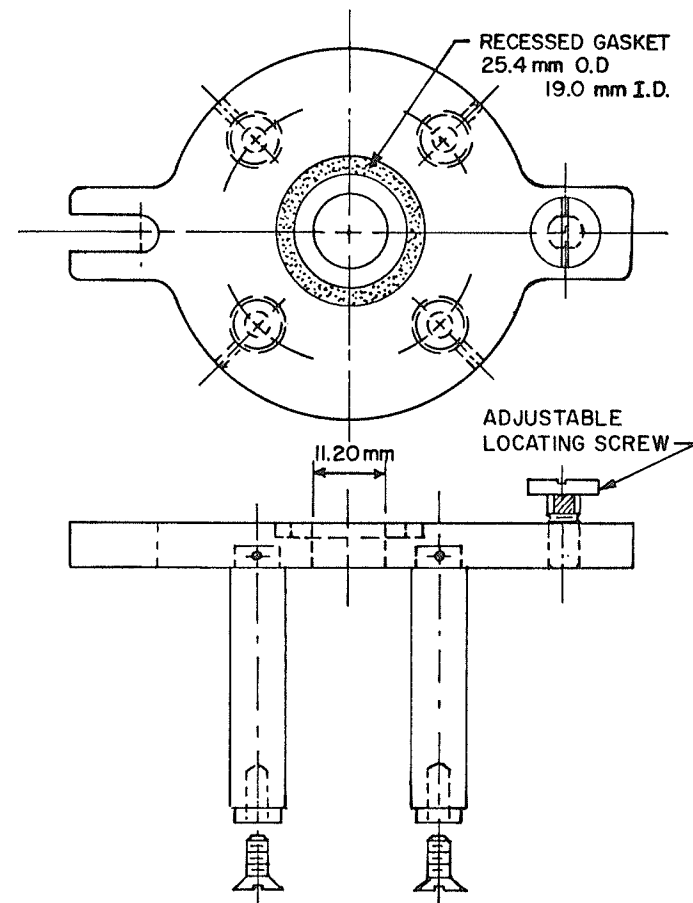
Specimen Holder for Hoffman/Turner Mini-Probe Tester
